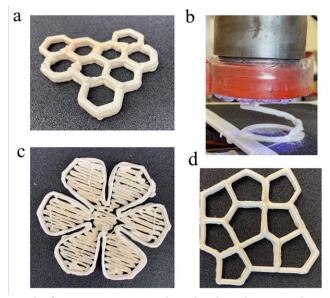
Several syntactic foam structures printed using the 3D printer. (a) honeycomb; (b) free-standing helical spring; (c) flower; and (d) 2D lattice.
